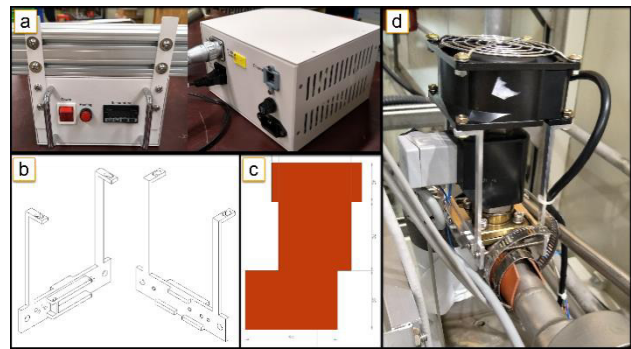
(a) The instrument chassis. (b) Clamp design. (c) Heating silicone rubber design. (d) Complete assembly.
